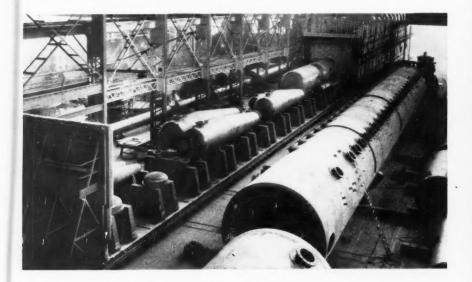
Loaded carrier is shown ready to be moved into annealing oven (center background).
